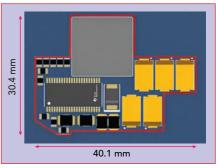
Board layout using the TPS7H4001-SP buck converter in the QML Class P package.
